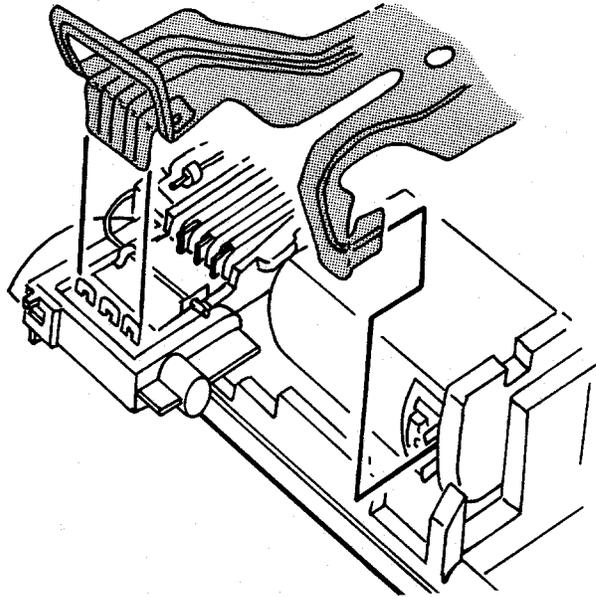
Removing Flex from Contact Support Block, Motor and Wire Block
